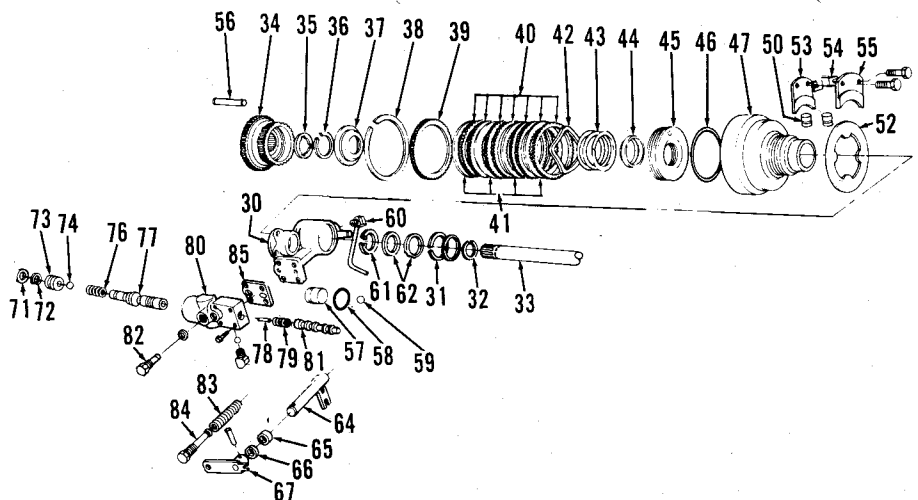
Exploded view of pto clutch, valve, shaft and related components used on Models TW-10, TW-20 and TW-30. Refer to Fig. 200 for view of shift mechanism.
